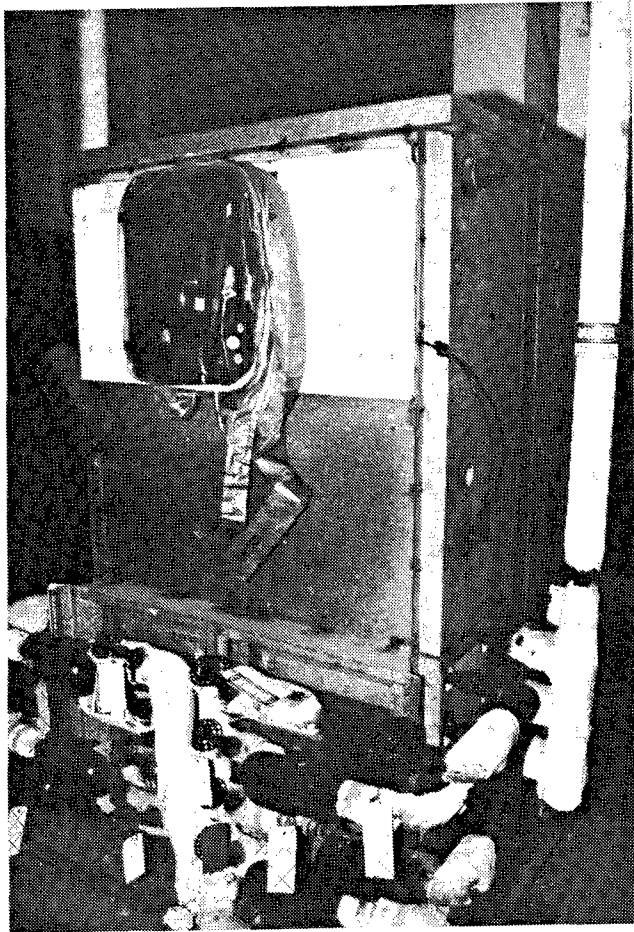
Building 841: Interior view of the Primer Dry House showing a Carrier drier oven for loaded primers manufactured in 1942.
